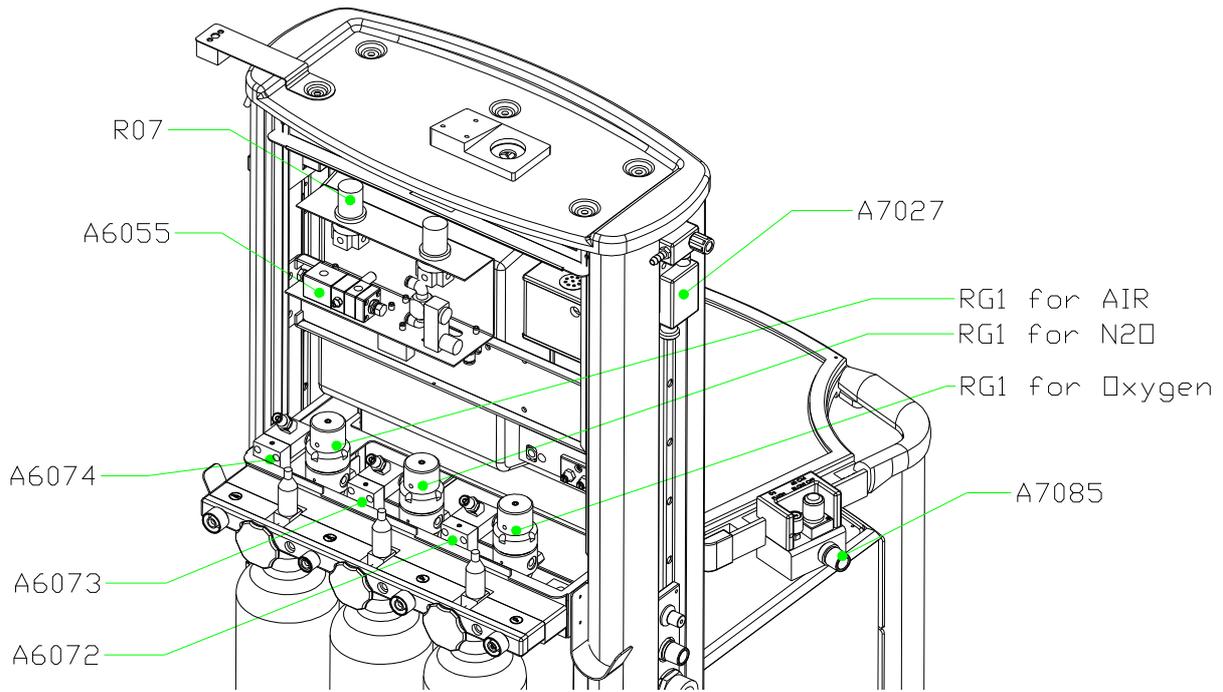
Location of A6055 Oxygen Failure Alarm on Anaesthetic machine
